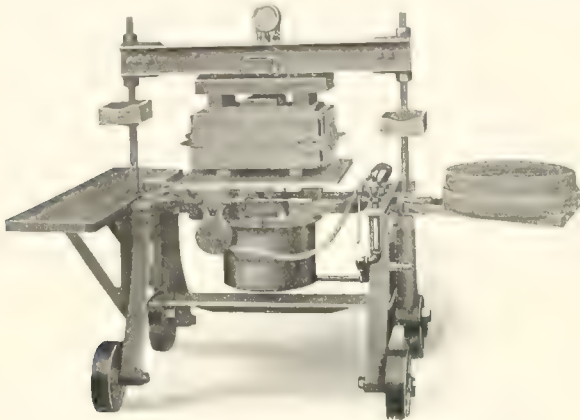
THE RUBBER MOLDING MACHINE OPERATED WITH RUBBER HOSE
